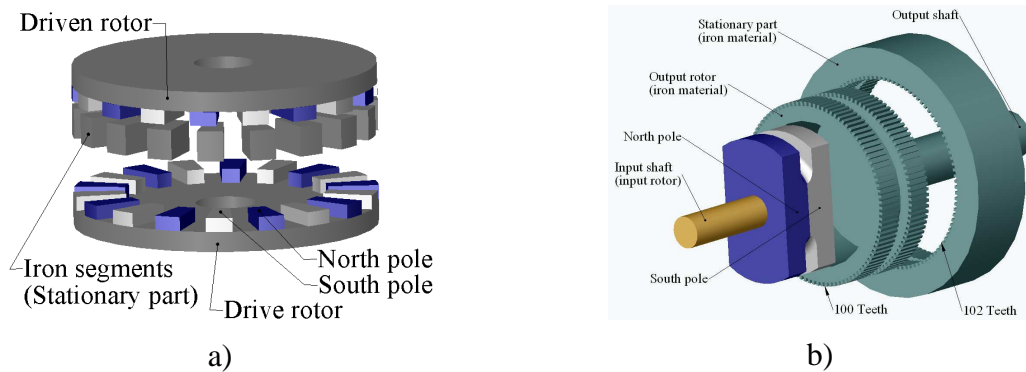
a) Axial version of the planetary alike gear [42]. b) The patent [43] describes a magnetic version of a harmonic drive [43].
